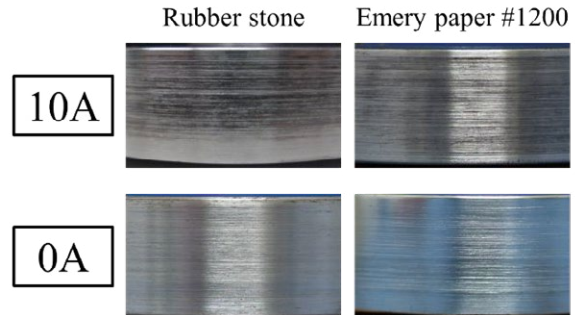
Photographs of the sliding surface of the slip rings after the experiments.
